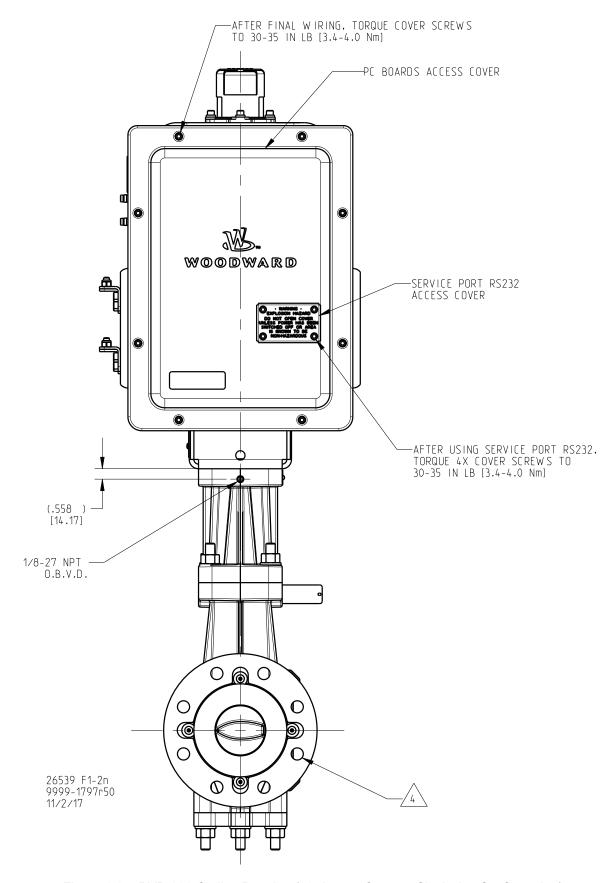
RVP-200 Outline Drawing (90-degree Counter-Clockwise Configuration)
